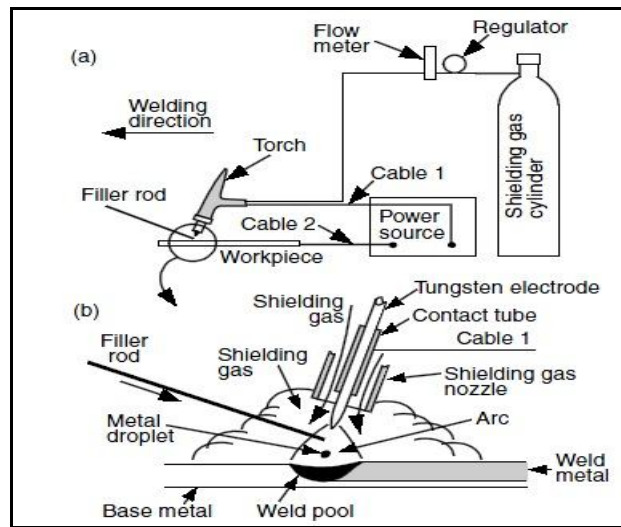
Gas–tungsten arc welding: (a) process; (b) fusion zone [9].
